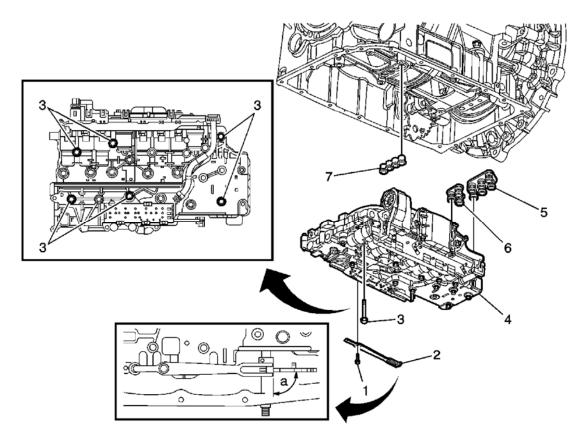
Control Valve Lower Body & Upper Body Courtesy of GENERAL MOTORS CORP.
